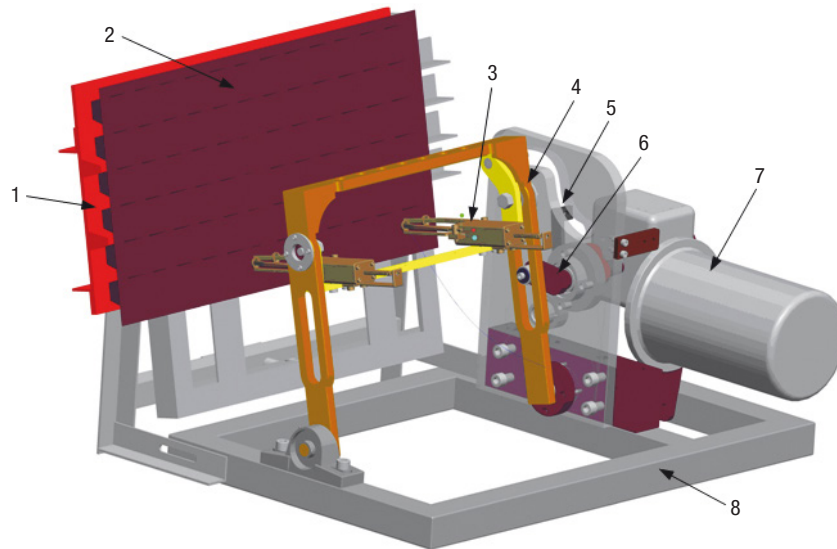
3D model of the seedling pick-up device: 1, cradle; 2, plug tray; 3, gripper; 4, door frame; 5, copying groove; 6, driving link; 7, driving motor; 8, frame.
